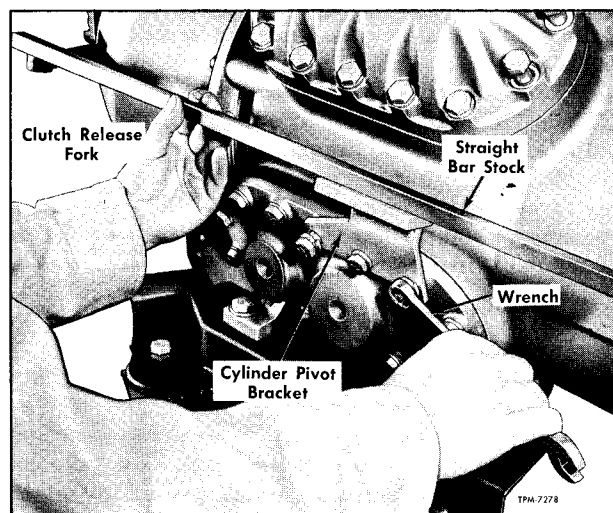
Checking Air Cylinder Mounting Bracket Alignment
